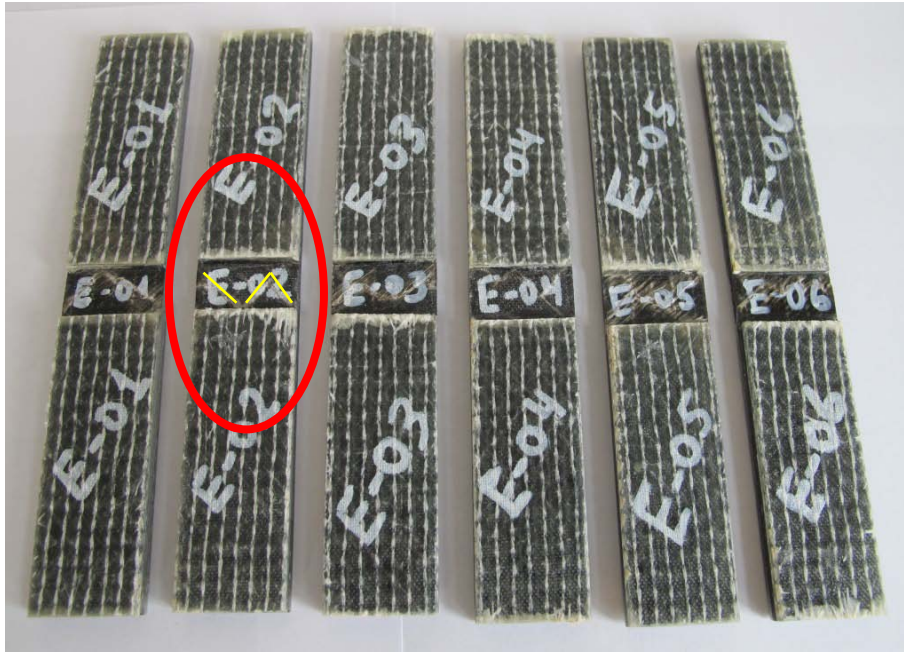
Broken specimens, type E $[(\pm 45^\circ)_3]_s$, after the compression tests, front view. Within the red circle is a schematic of in-plane shear failure geometry.
